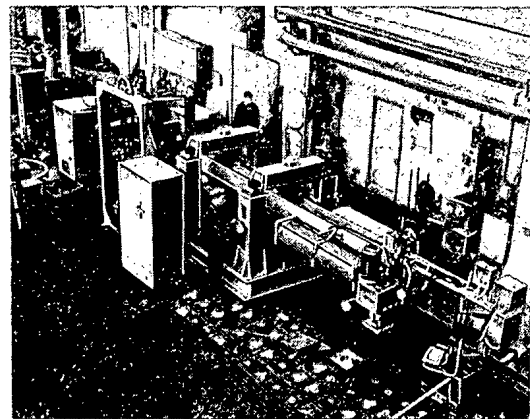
Cutting device for the processing of the inside welding seams in shells.
